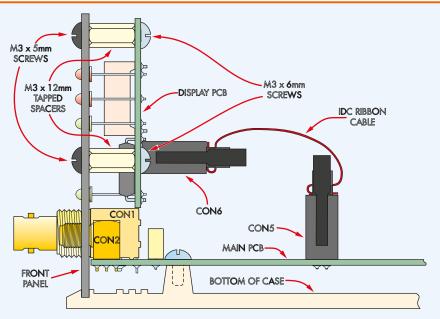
the mounting details for the two PCBs. The display PCB is attached to the front panel using M3 \times 12mm tapped spacers and eight M3 screws (note the different lengths for the screws at each end of the spacers). This PCB assembly is then connected to the main PCB via a 20-way IDC cable (see Fig.11 for details).
